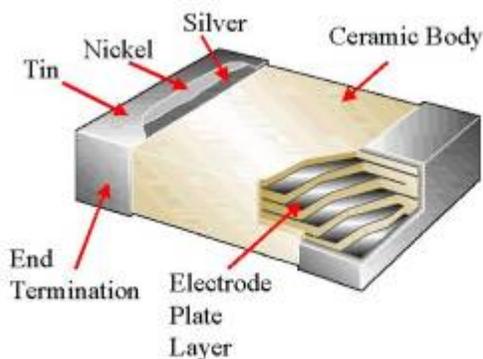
Cutaway drawing of a Multilayer Ceramic Chip
